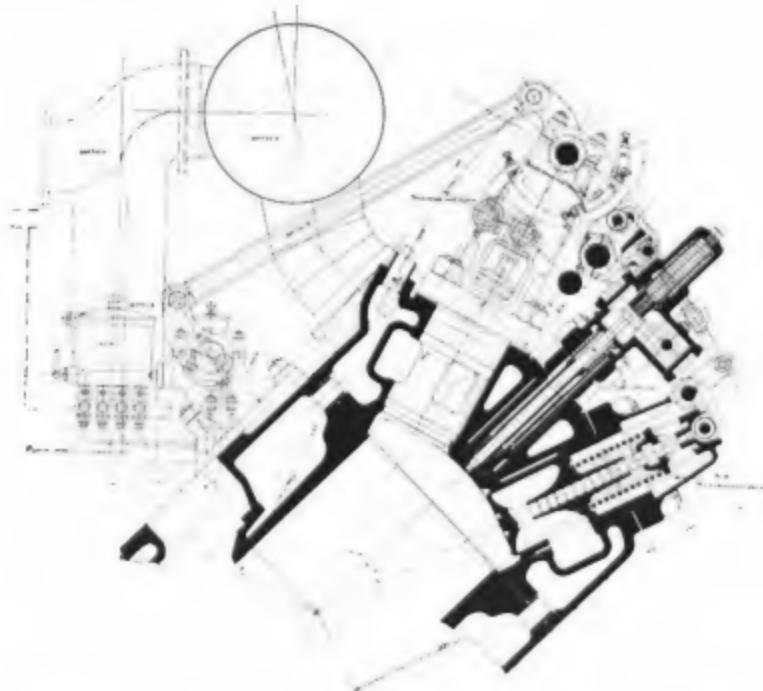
DETAILS OF FUEL VALVE AND TWO AIR-SCAVENGING VALVES.
